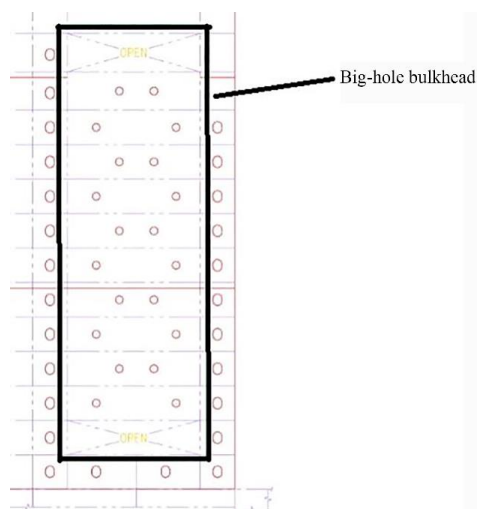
Large span structural support design of large oil storage tank in multi-column SEMI platform.
